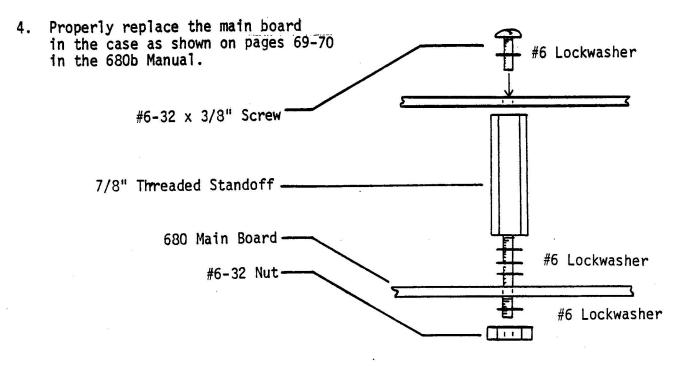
Installation of Threaded Standoffs onto 680b Main Board
